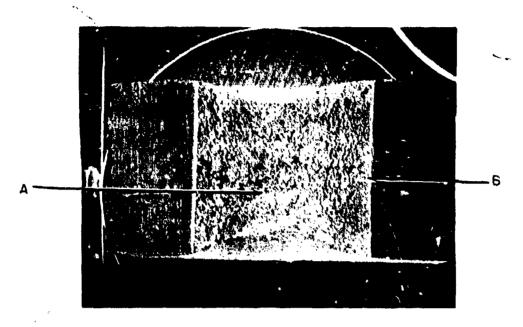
Fatigue fracture surface of A-36 steel, 8x.
